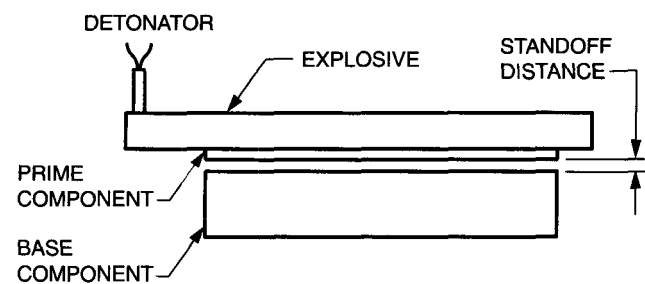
Typical Component Arrangement for Explosion Welding
